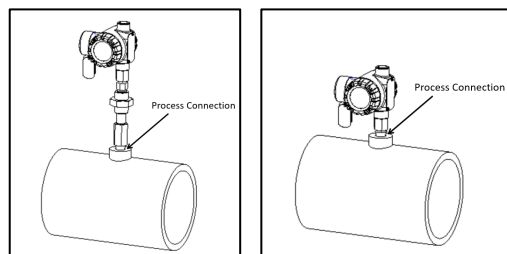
STT85A RIGID (NO THERMOWELL) OR THREADED THERMOWELLTYPE MOUNTING
